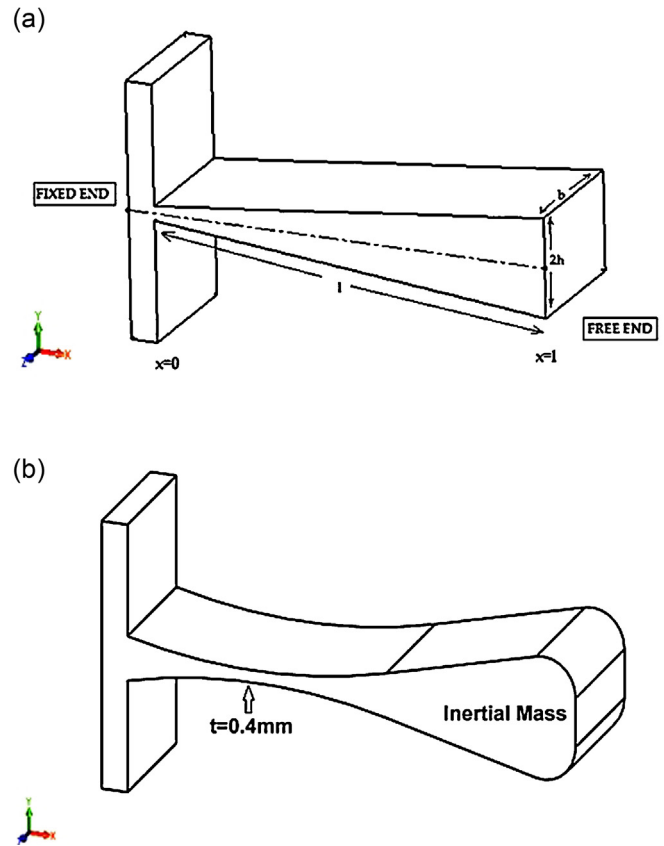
(a) Cantilever beam with increasing cross section area (b) Modified cantilever beam.
